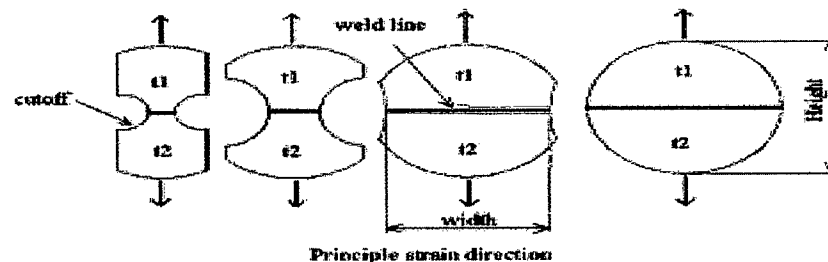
Weld line orientation of the tailor welded blank (S. M. Chan, 2003)
